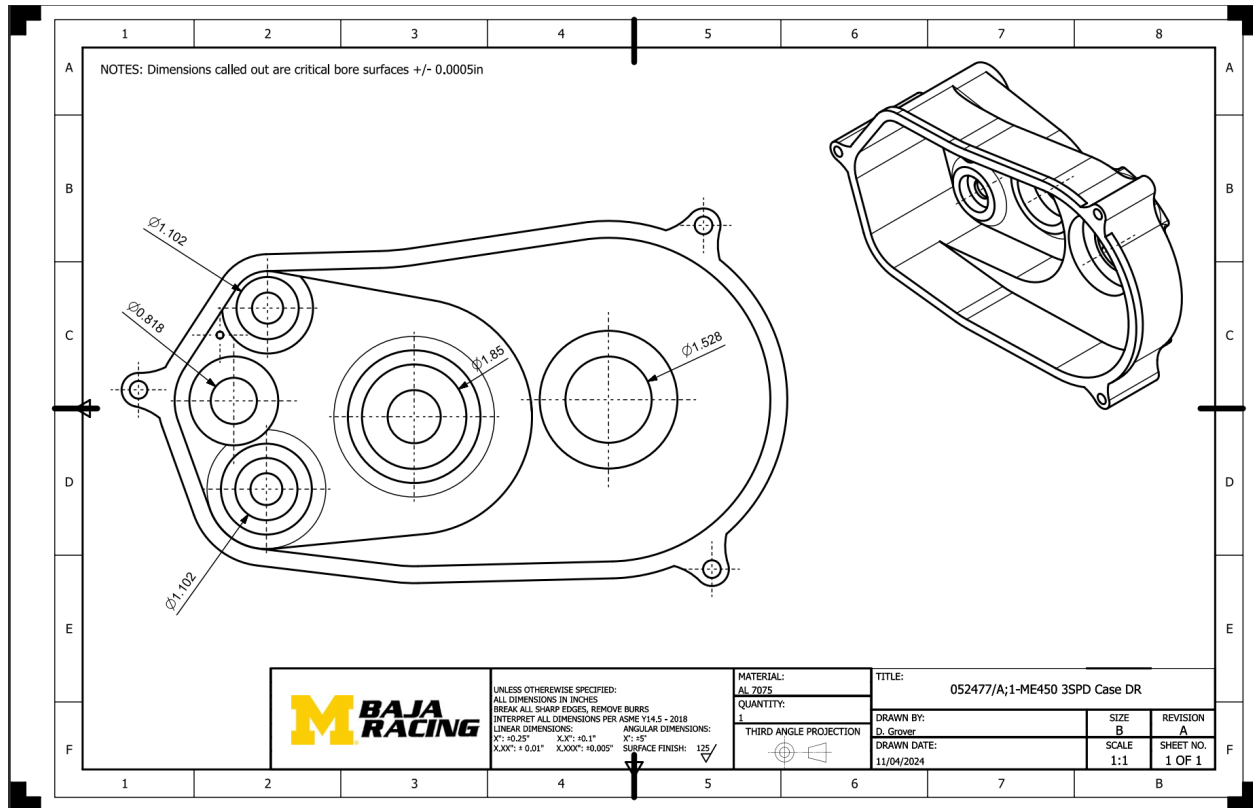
Part drawing of the gearbox case DR with callouts for bearing journals' tighter tolerances.
